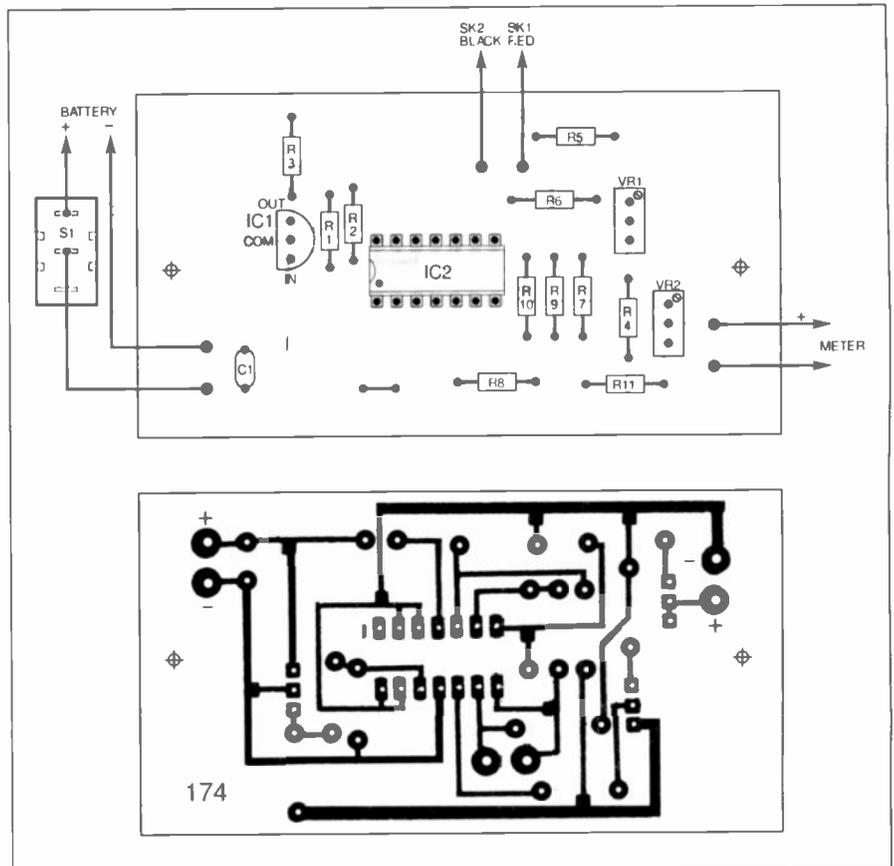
Printed circuit board component layout. off-board wiring details and full size underside copper foil master pattern.
